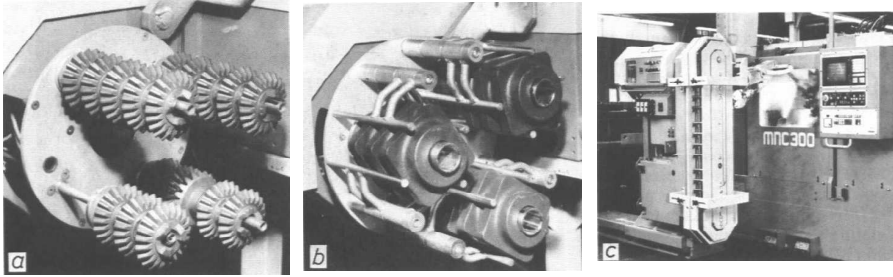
Rotational parts stores: *a), b)* – stores for parts clamped using chucks, *c)* – store for shaft type parts
